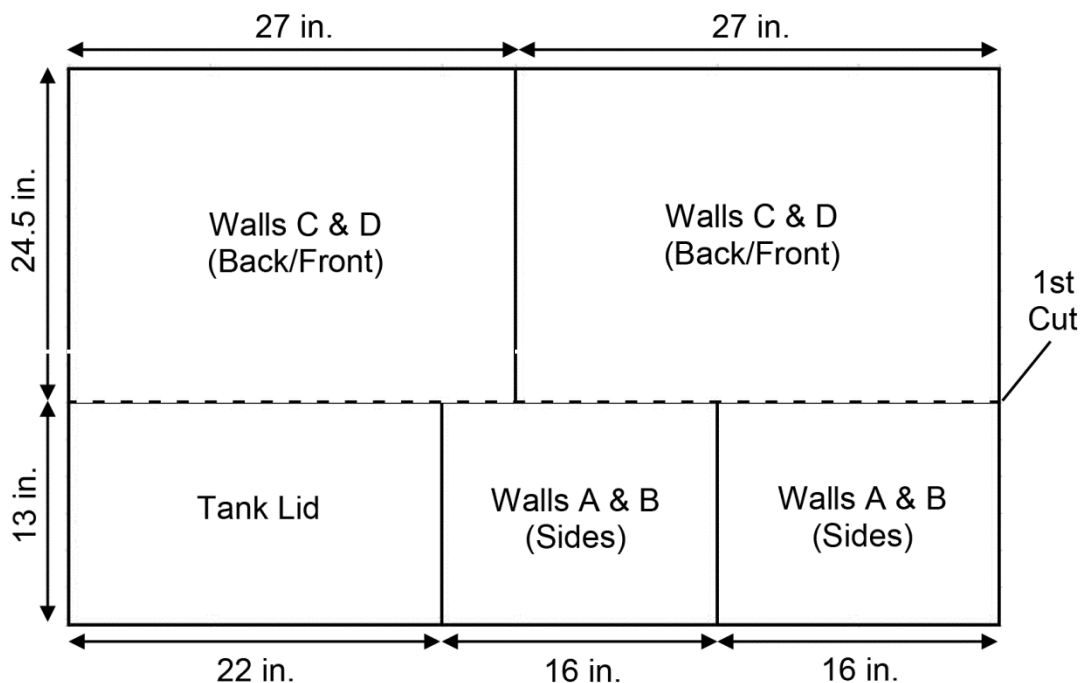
80- Gallon Tank Rubber Sheeting Dimensions
